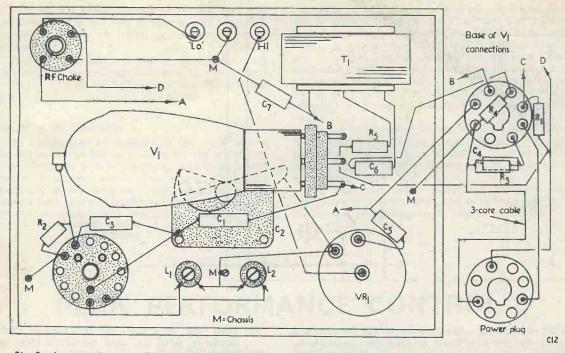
Layout and wiring. The valveholder is shown flat to illustrate the underside wiring. The position of coil and choke tags may differ from those shown here
